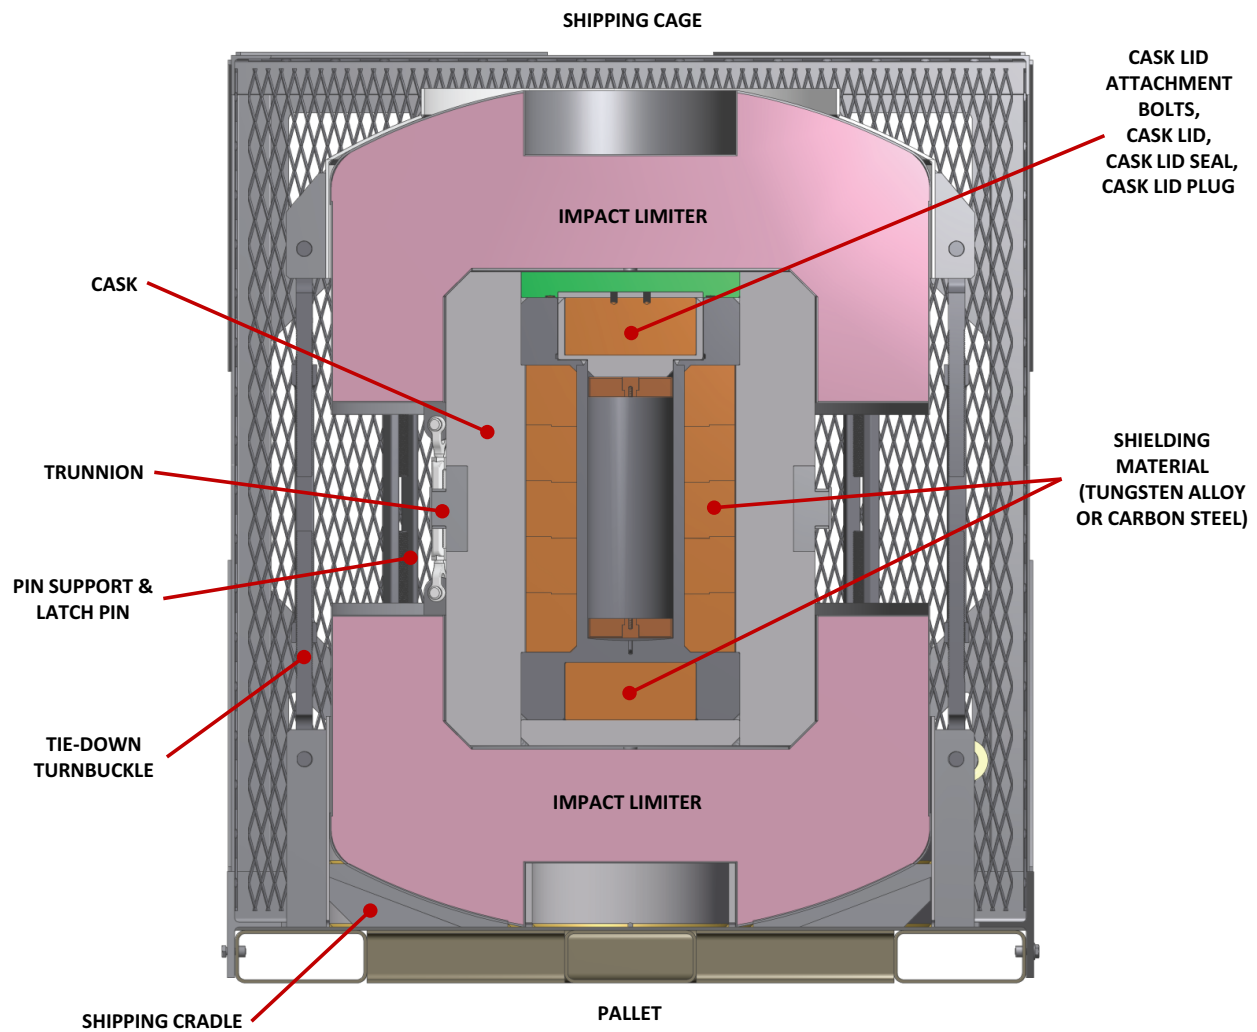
Assembled Transport Package Cutaway – Models AOS-100A and AOS-100B
